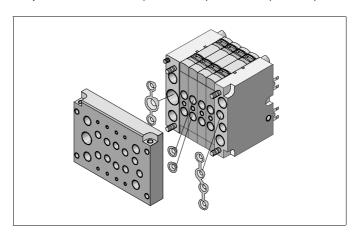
/12: Fitting the CPV valve terminal onto the pneumatic multiple connector plate
